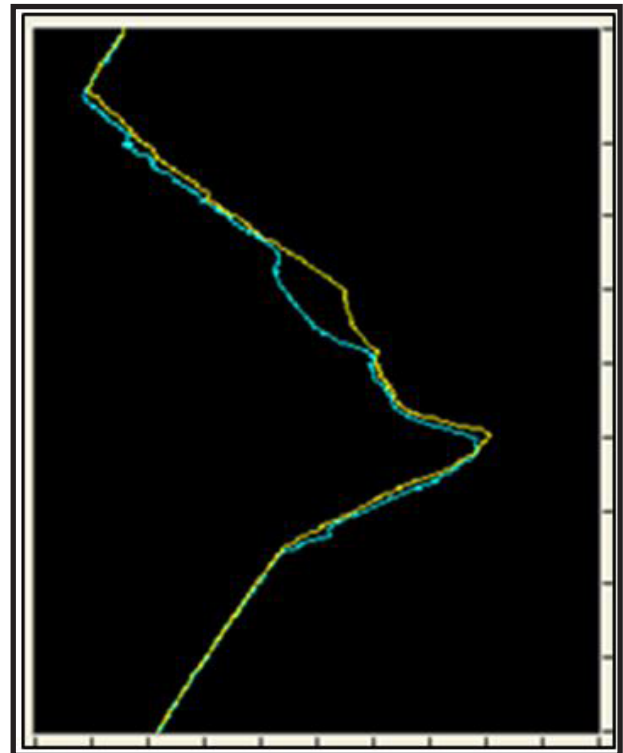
Overlaid successive laser scans of a multi-pass weld
